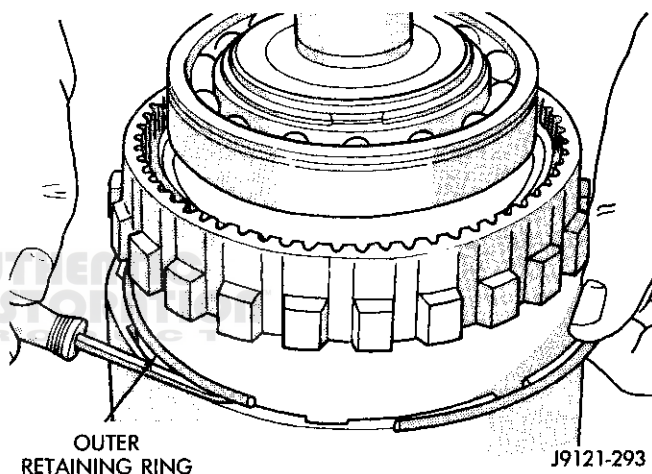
Clutch Drum And Outer Retaining Ring Installation
